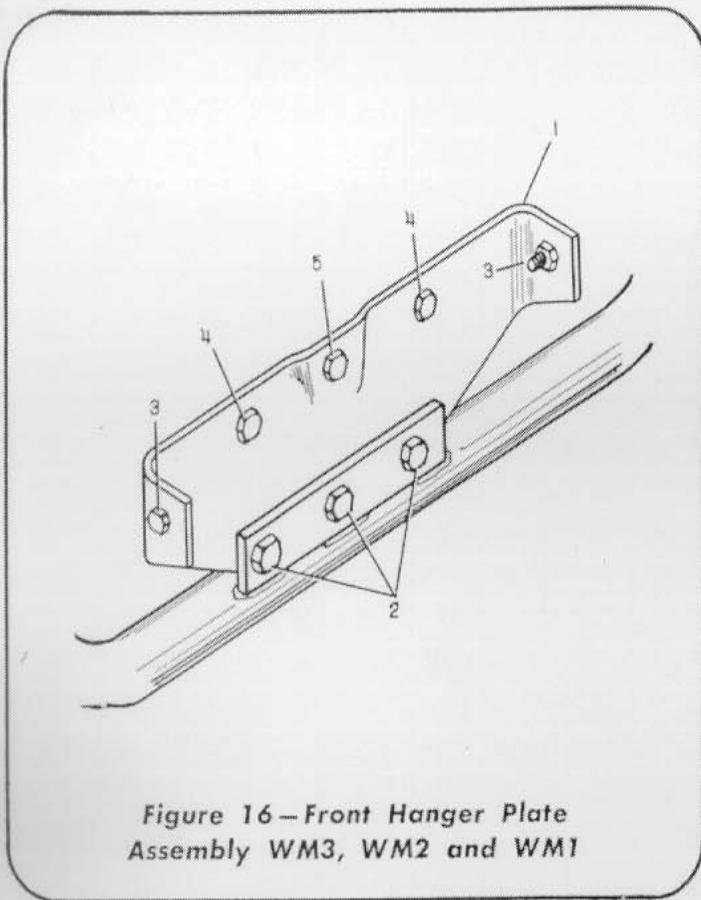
Front Hanger Plate Assembly WM3, WM2 and WM1
